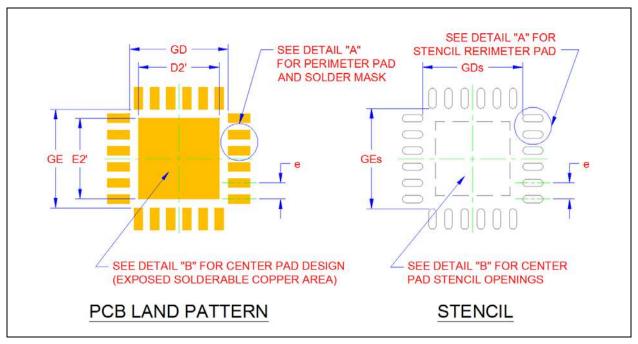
CAP1188 PCB Land Pattern and Stencil - 24-Pin QFN 4mm x 4mm
